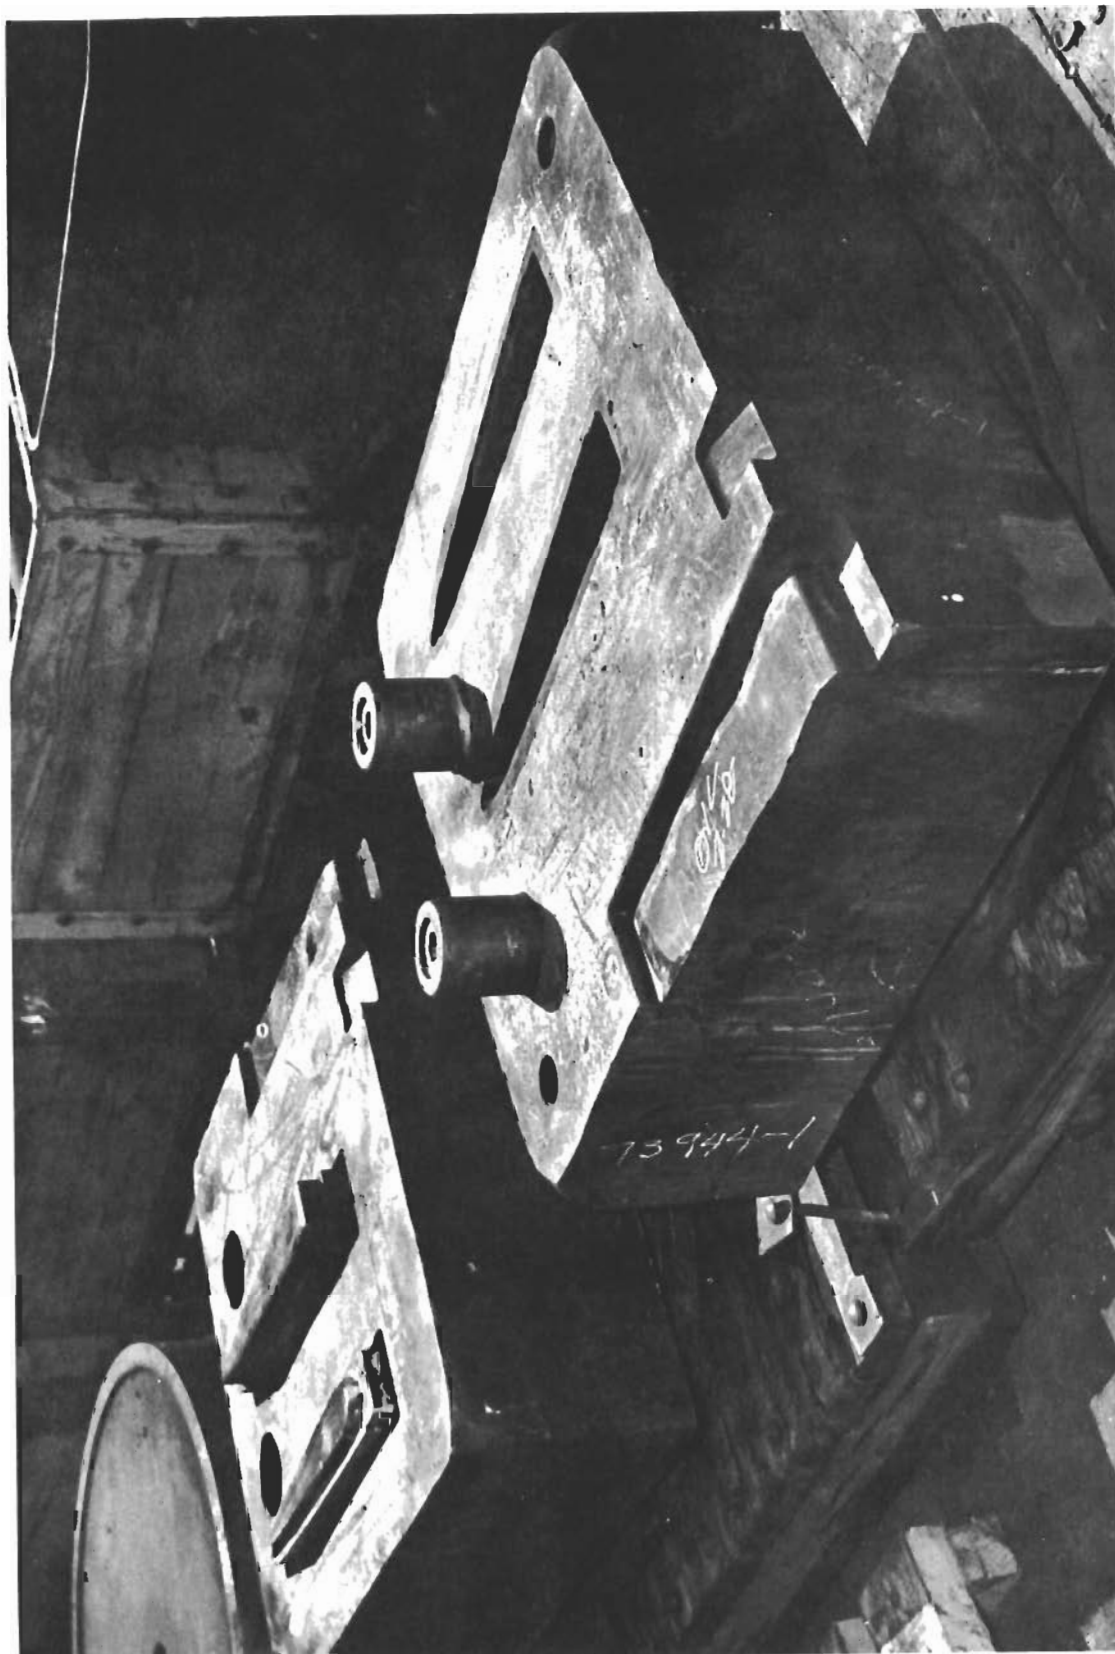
Multiple Impression Dies for Blocker and Finish Fin Rib Forging Operations with 6000 Ton Hydraulic Press.
